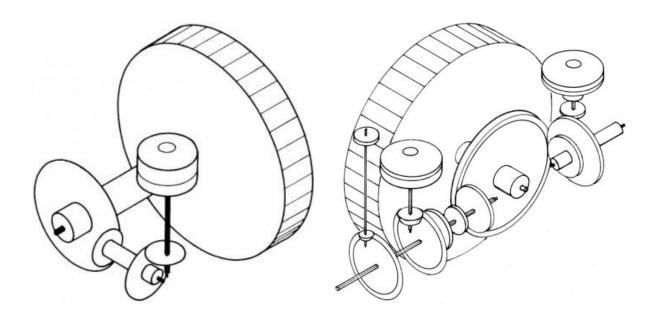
[left] Treble mill gearing layout: drive to a single pair of stones. Figure 15: [right] Double layshaft drives to two pairs of millstones: diagrammatic reconstruction of the layout at Brynn Mill.
